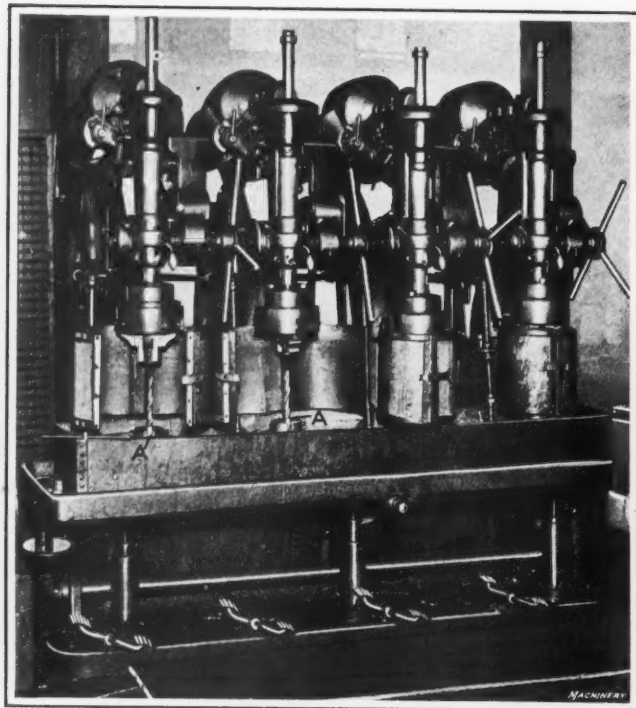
Rockford Gang Drilling Machine employing Principle of Inverted Drilling
